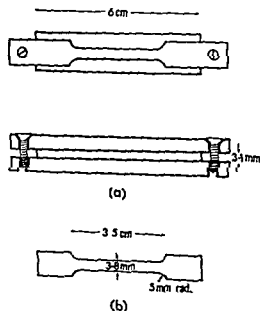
(a) Template production of tensile test piece (b) Dimensions of completed test piece
